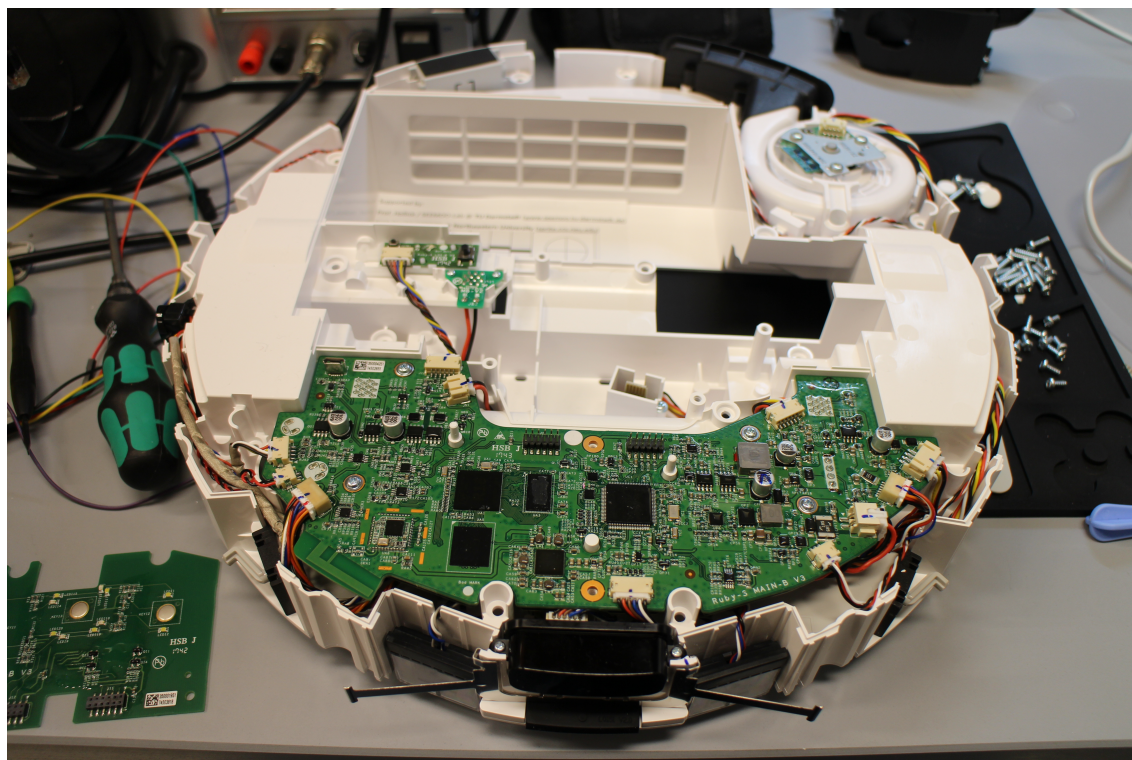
Disassembled Roborock Vacuum Cleaner S50
